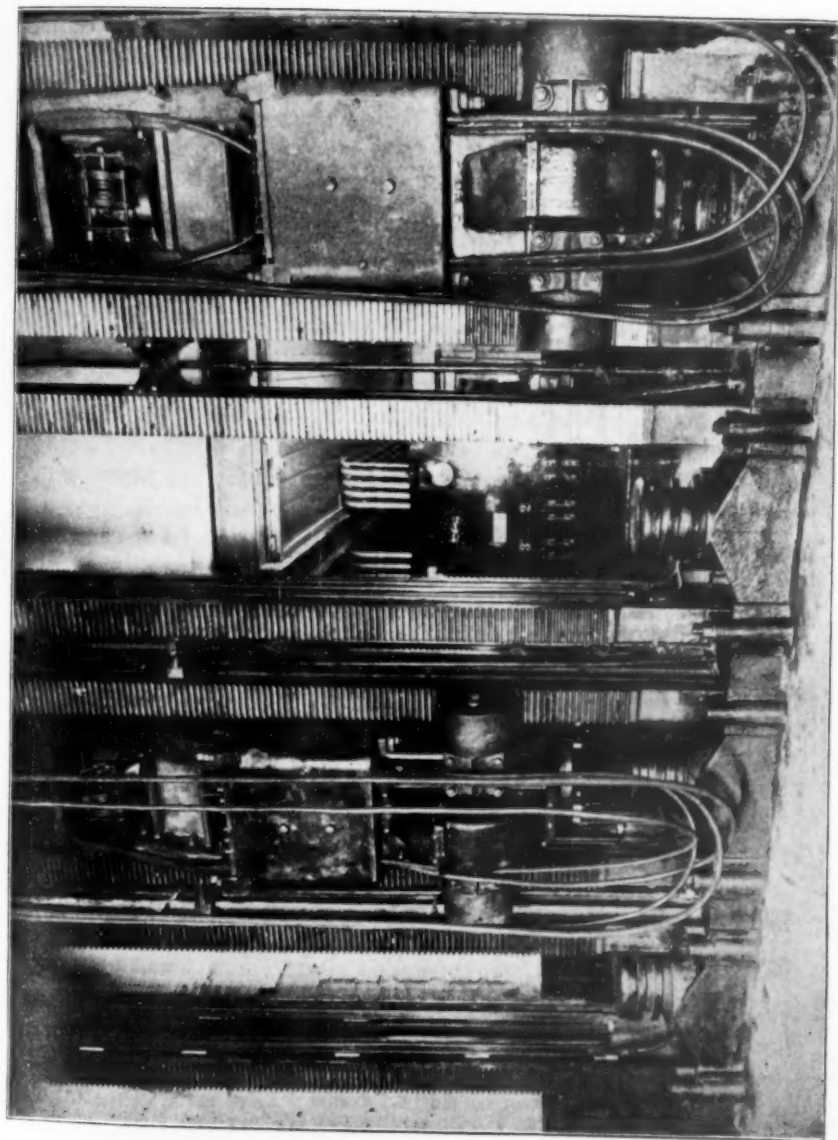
VIEW SHOWING FLEXIBLE CABLES
